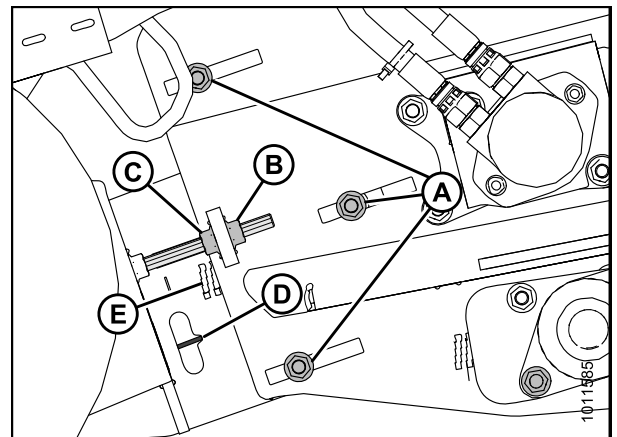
Left Side Front Deck Shown – Right Side Opposite
